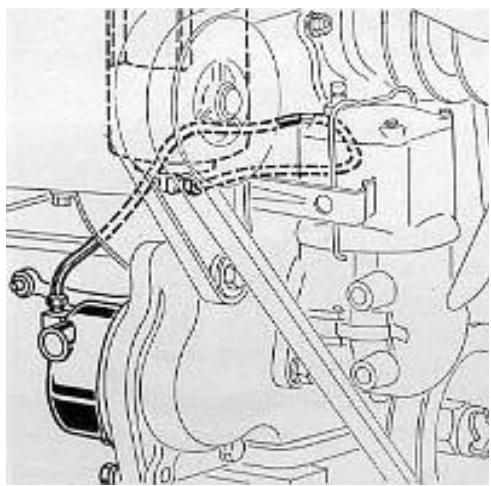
Governor external oiling system on models 2N-8N-9N.
